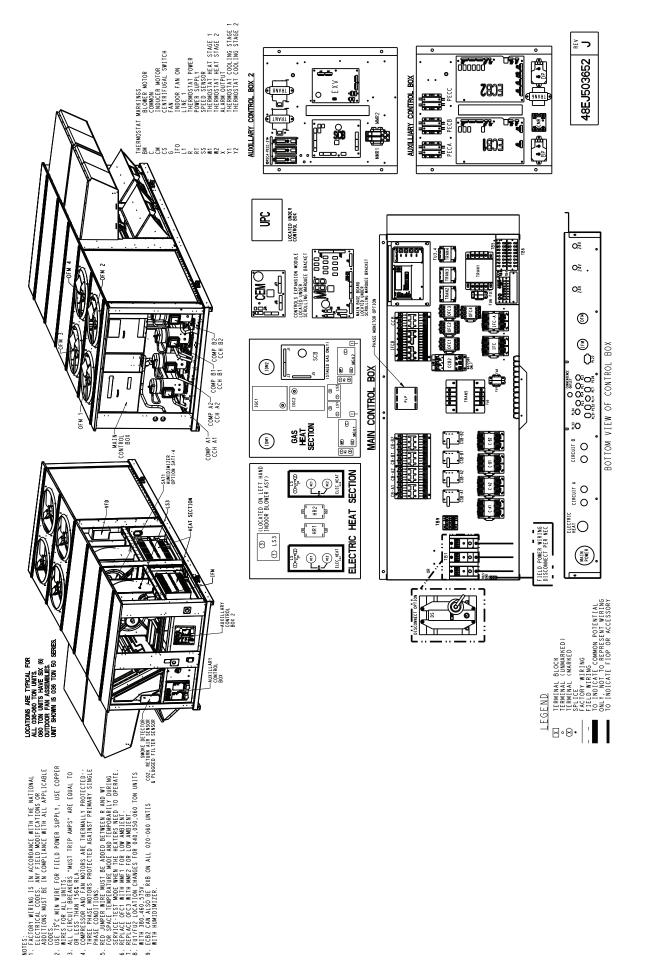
Typical Small Chassis Component Location (Size 020-035 Units)
